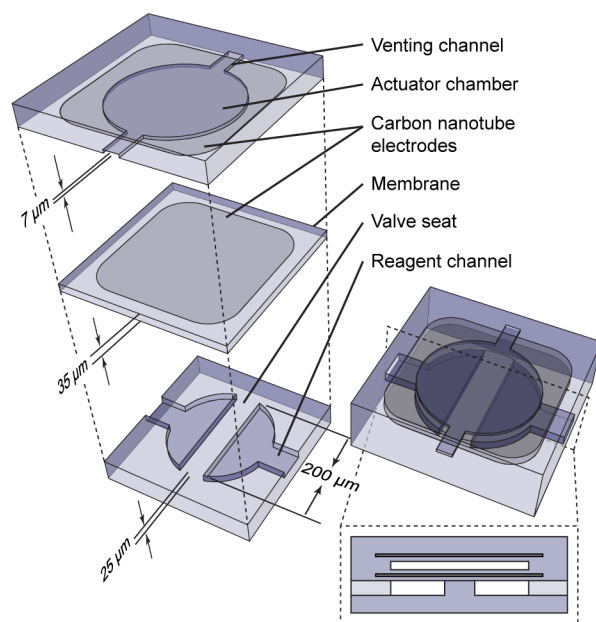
An exploded view, a perspective view, and a cross-sectional view of a normally-closed electrostatic microvalve fabricated exclusively with soft-lithographic techniques. Not drawn to scale.
